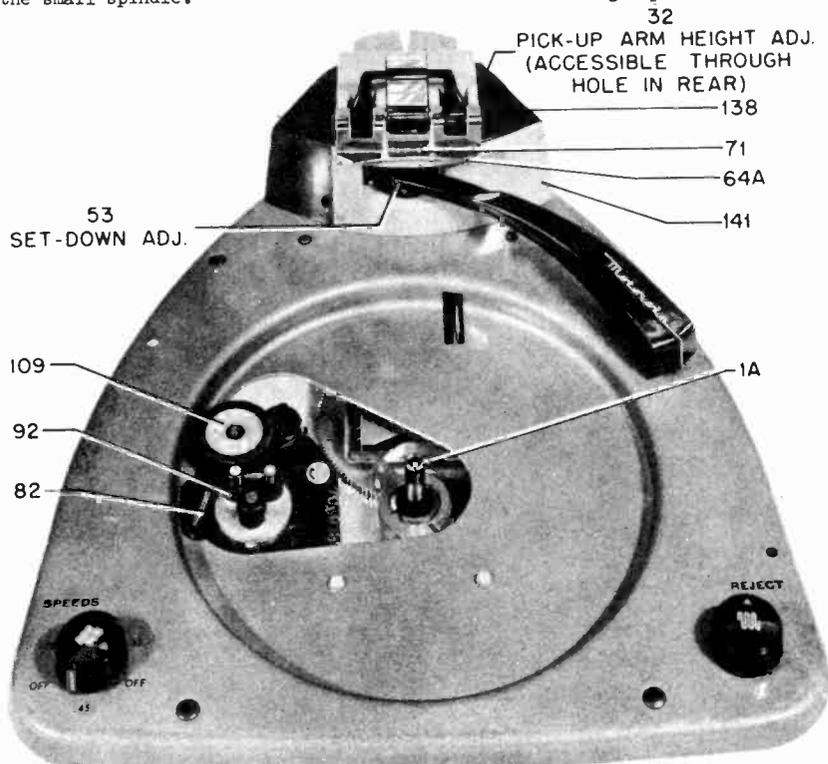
TOP VIEW OF RECORD CHANGER WITH TURNTABLE REMOVED
